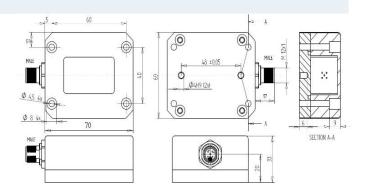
QG76 housing size - 70 x 60 x 33 mm
